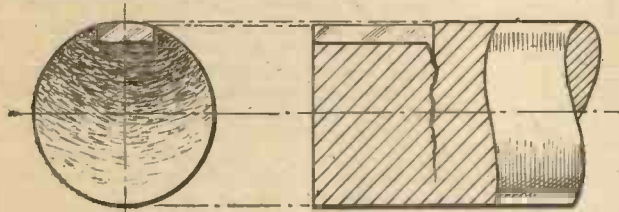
Sketch showing fractured shaft which failed owing to the gradual spreading of a crack from the bottom of the key seat, the start of the crack being a "V"-shaped notch left by the point of a chisel used to clean up the end of the key seat.
